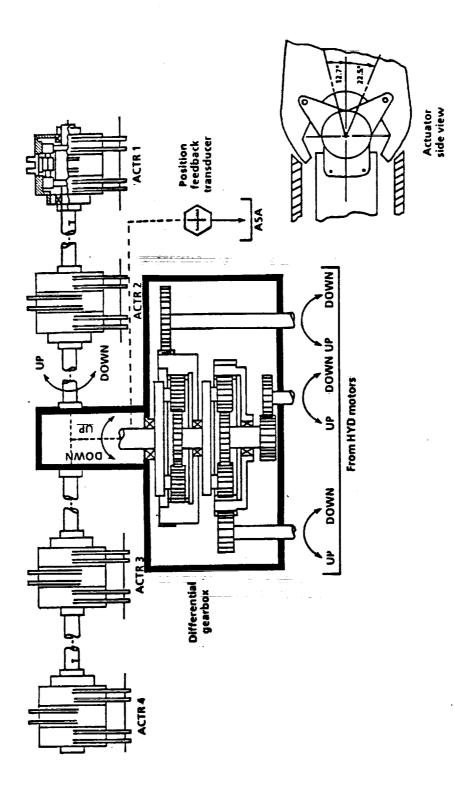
BODY FLAP DIFFERENTIAL GEARBOX AND ROTARY ACTUATORS
